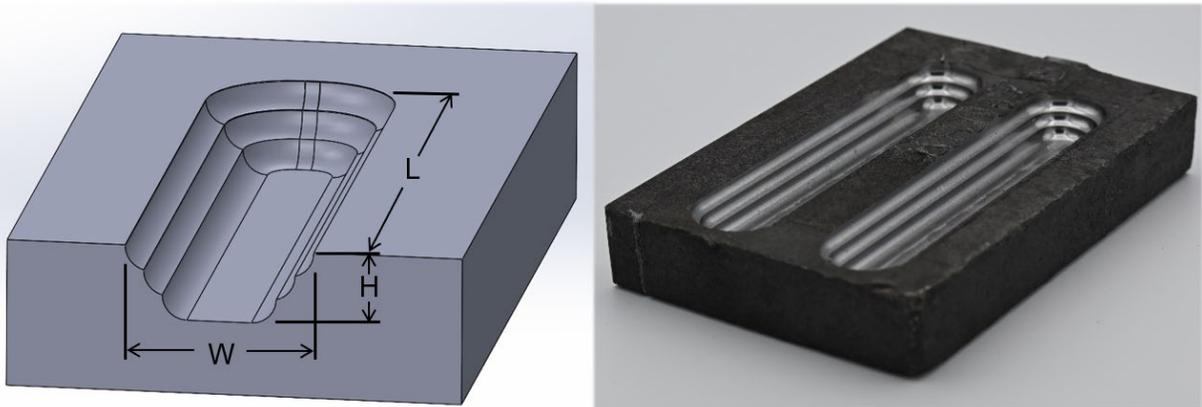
Terraced cavity geometry created using a bullnose endmill.
